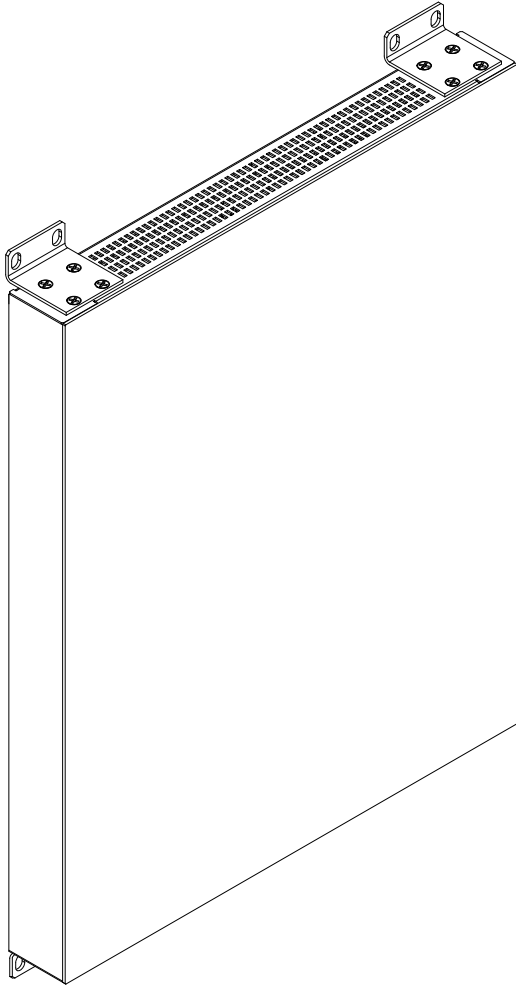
Mounting vertically on a flat surface: Optional mounting on a vertical flat surface.
